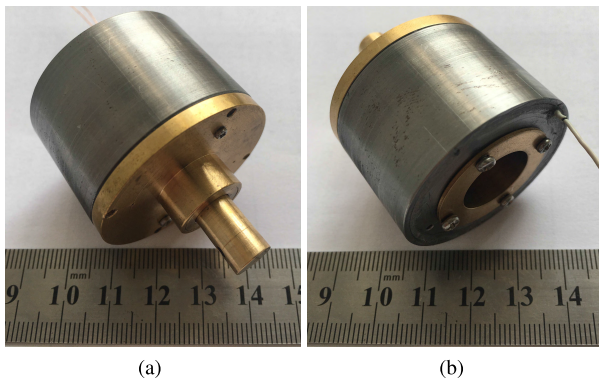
Fabricated hollowed multi-drum brake with 8 mm hollow casing radius. (a) Front view and (b) rear view.
